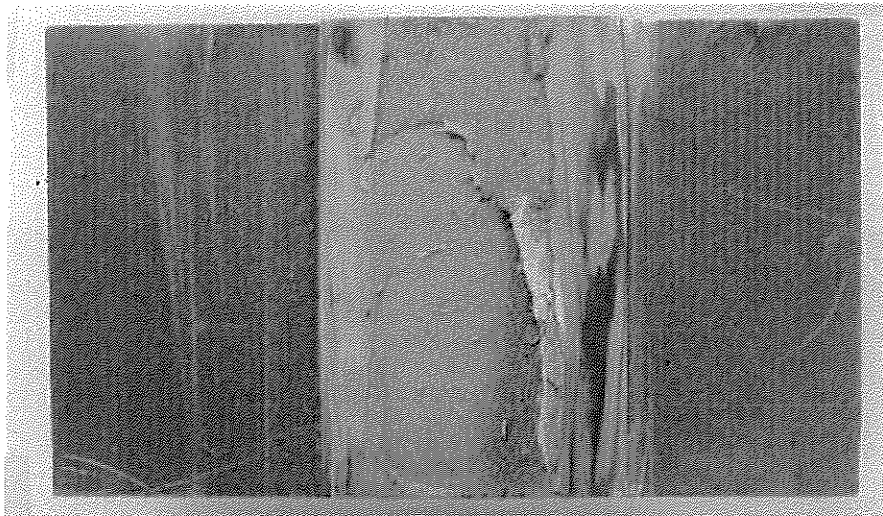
Fracture surface and pass after fracture toughness test (FTI-5, -173°C)
